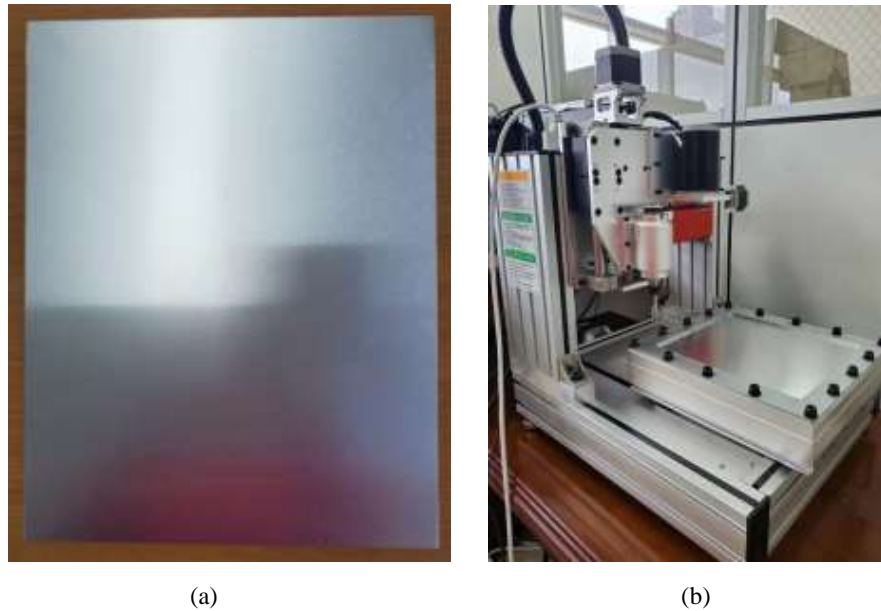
Experimental sheet 210 mm  $\times$  250 mm (a) and customized three-axis CNC milling machine (b)
